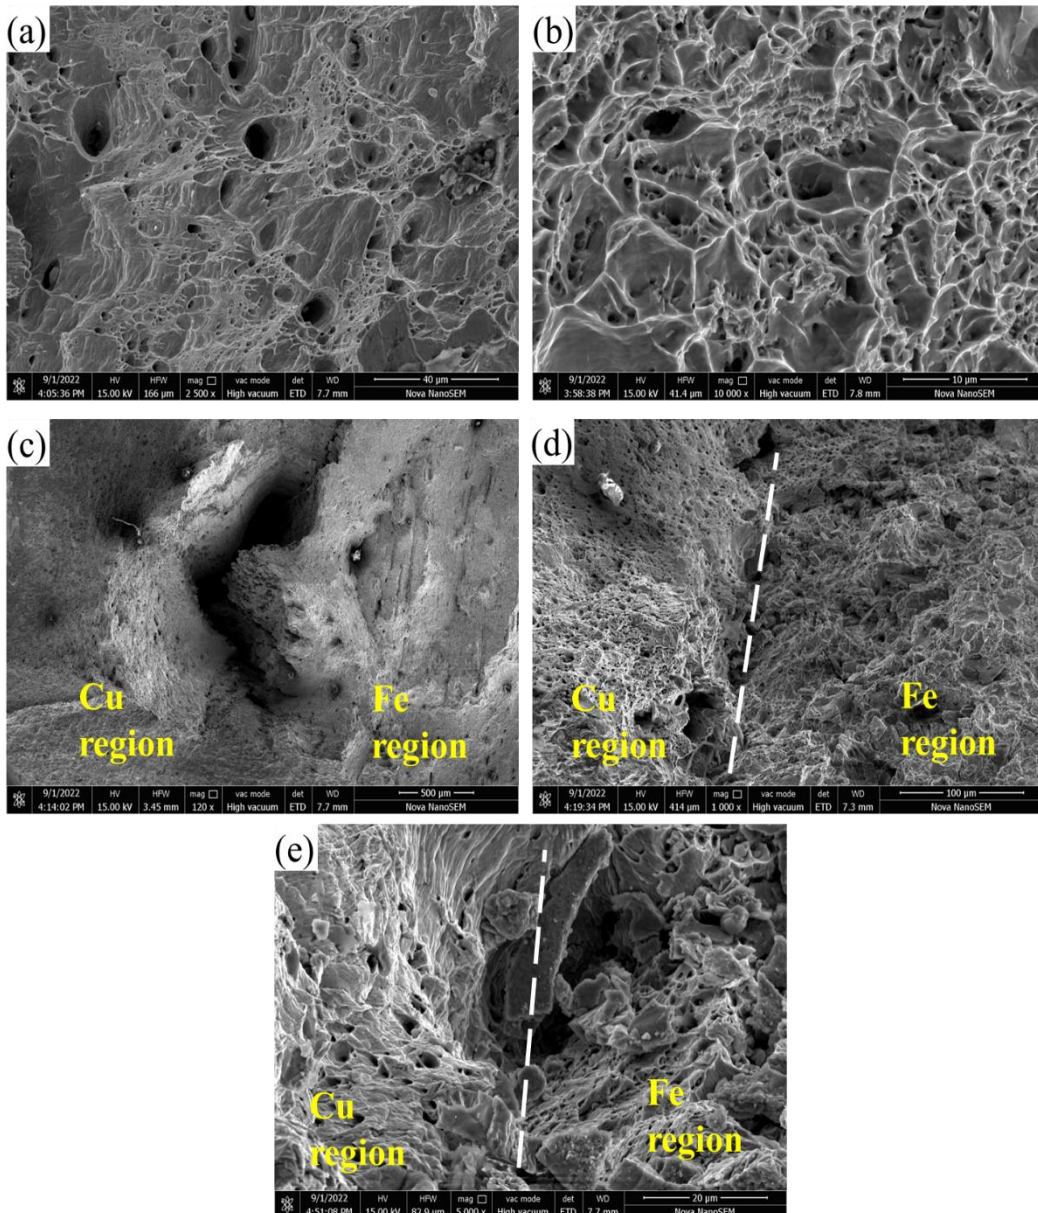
Fractography images for (a) received copper (b) received mild steel (c) copper clad steel fractured face portion (d) interface fractured surface (e) enlarged copper steel interface showing dimples in copper
